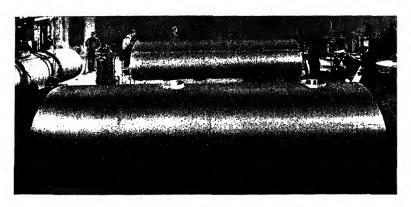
Fabrication of oxwelded stainless steel tanks.
